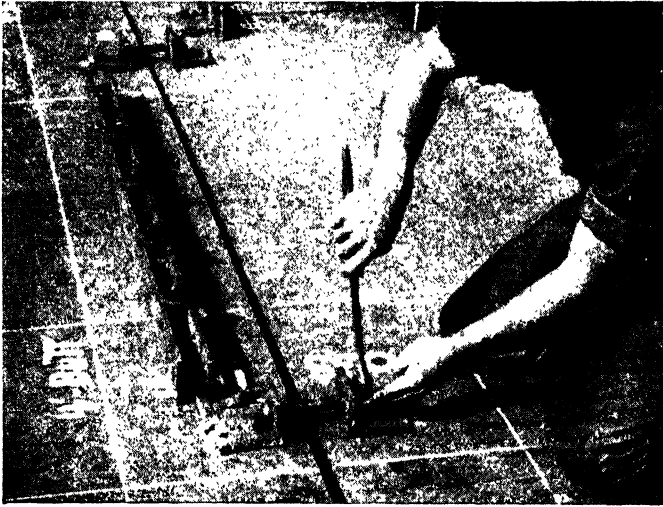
Lining up and pulling all-welded heavy deck plating.
